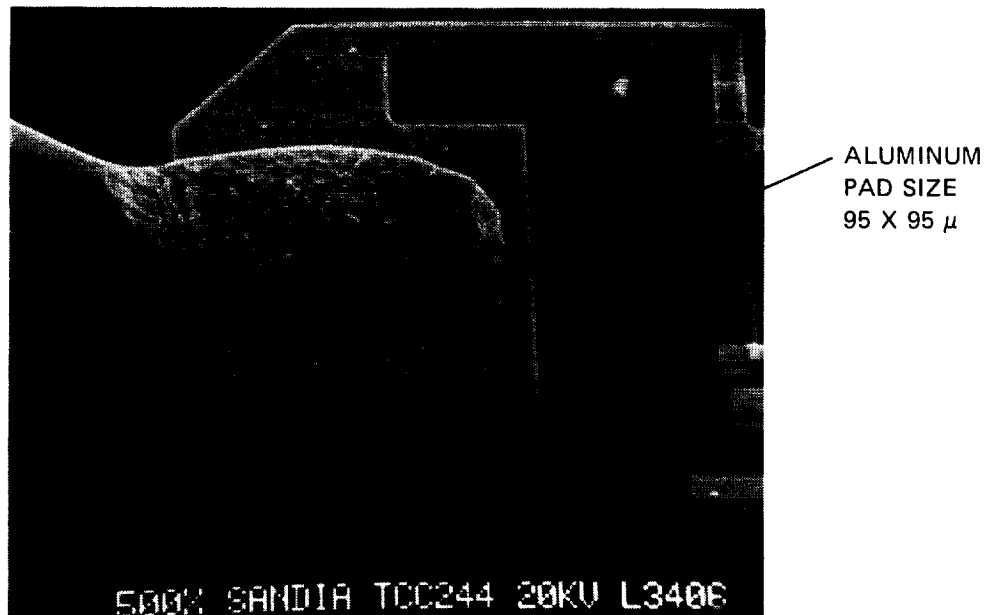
500x SEM view of exposed metal pad with a typical wire bond.
